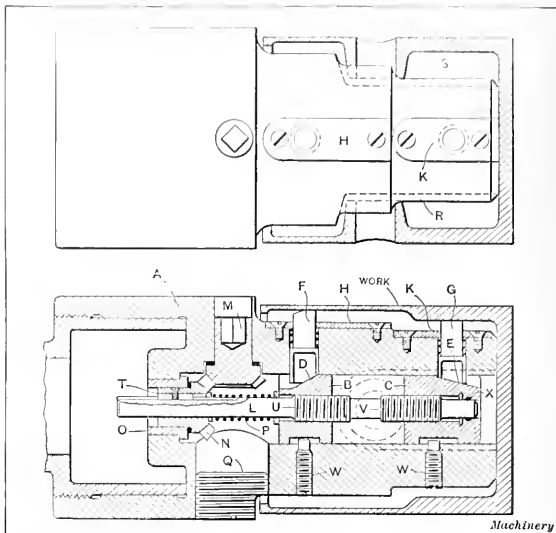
Special Chuck for holding Gas Engine Pistons internally
